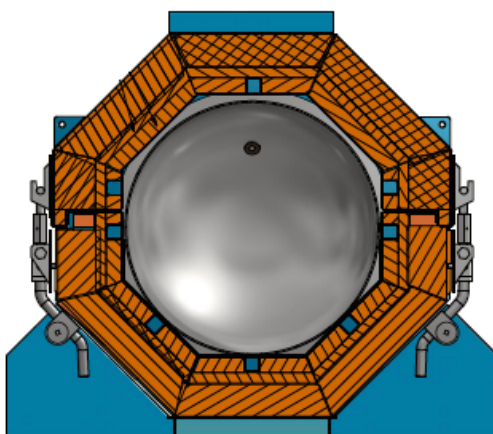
Kevil Kougar Impact Limiting Components Sample Arrangement
